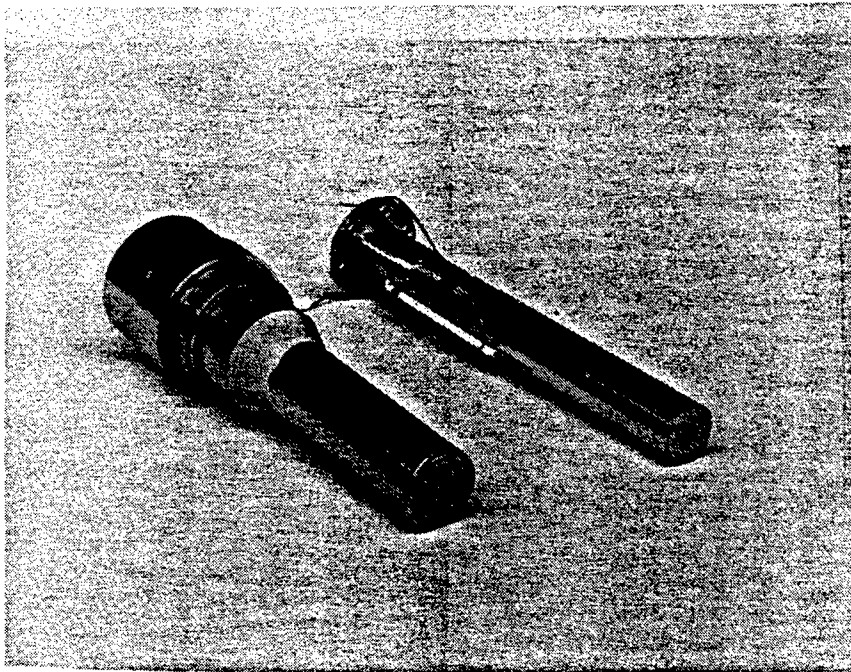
Front views of tungsten button/heat choke subassembly (left) and guarded electrode subassembly.
